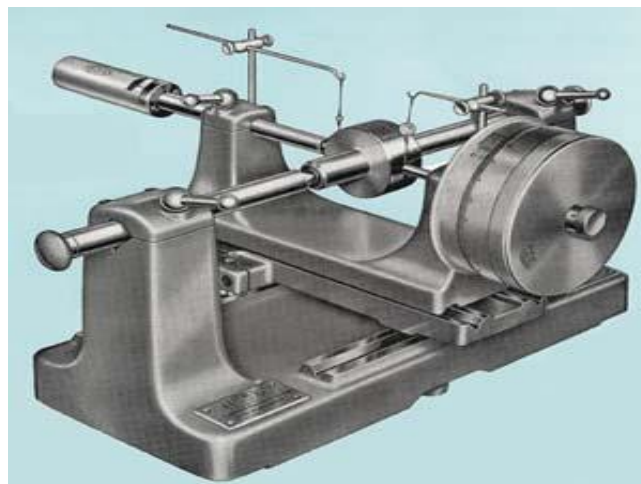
Matrix Floating Carriage Diameter Measuring Equipment
